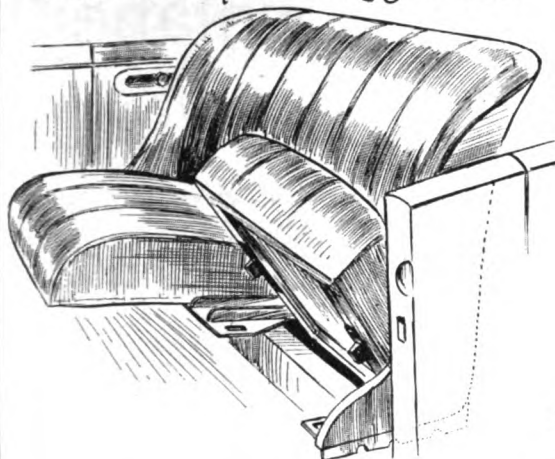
Seat arrangement on Riley car showing wing nut locking device.
